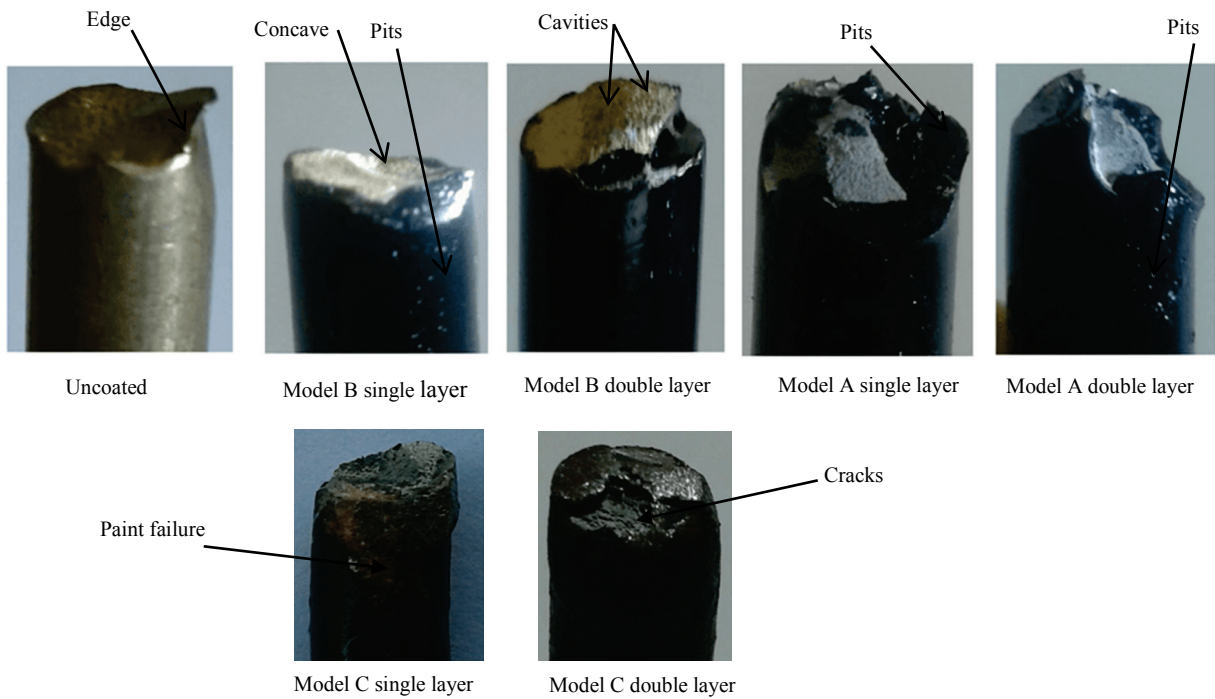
Fracture surface of specimens after fatigue test in the air.
